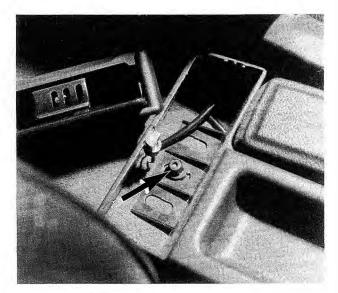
Screw under ashtray (arrow) that secures parking brake handle trim. Remove screw and pull trim back slightly to release at front.
